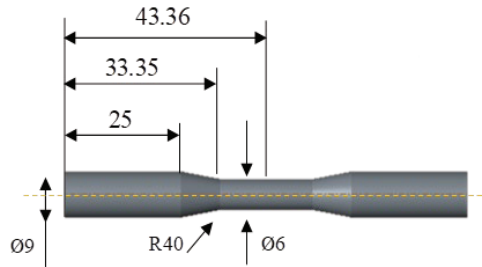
Geometry and dimensions of the samples for SSRTs
